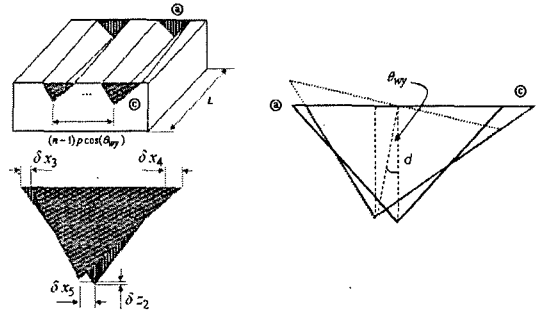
Micro-features with setup error by workpiece rotation about the y axis
